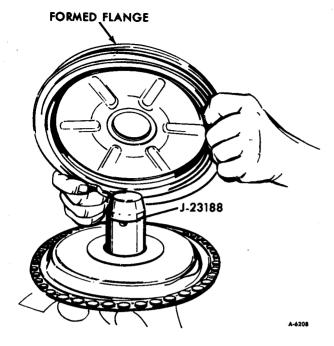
Positioning Housing Divider Over Secondary Bearing Protector Tool J-23188
